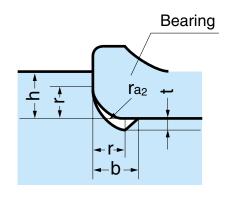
Chamfer Dimension, Radius of Corner Roundness, and Shoulder Height
